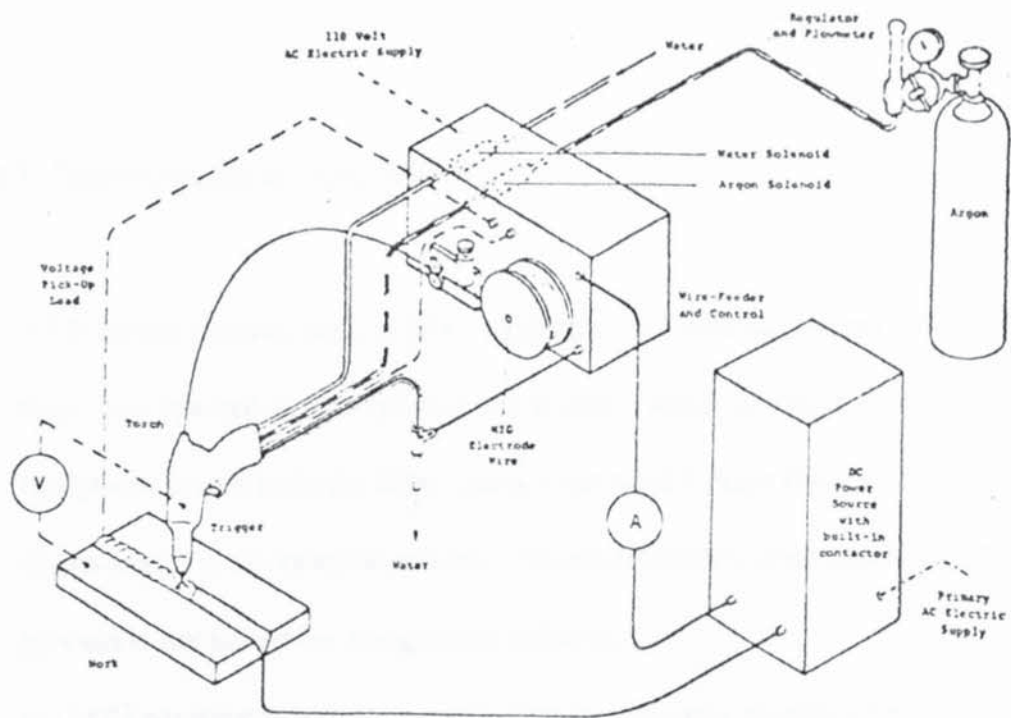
Schematic drawing of a typical MIG welding unit.
